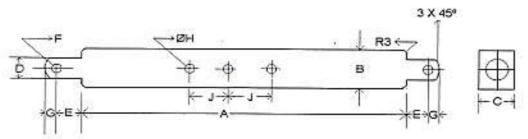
(b): DIMENSIONAL NOTATIONS FOR LINKAGE DRAWBAR
